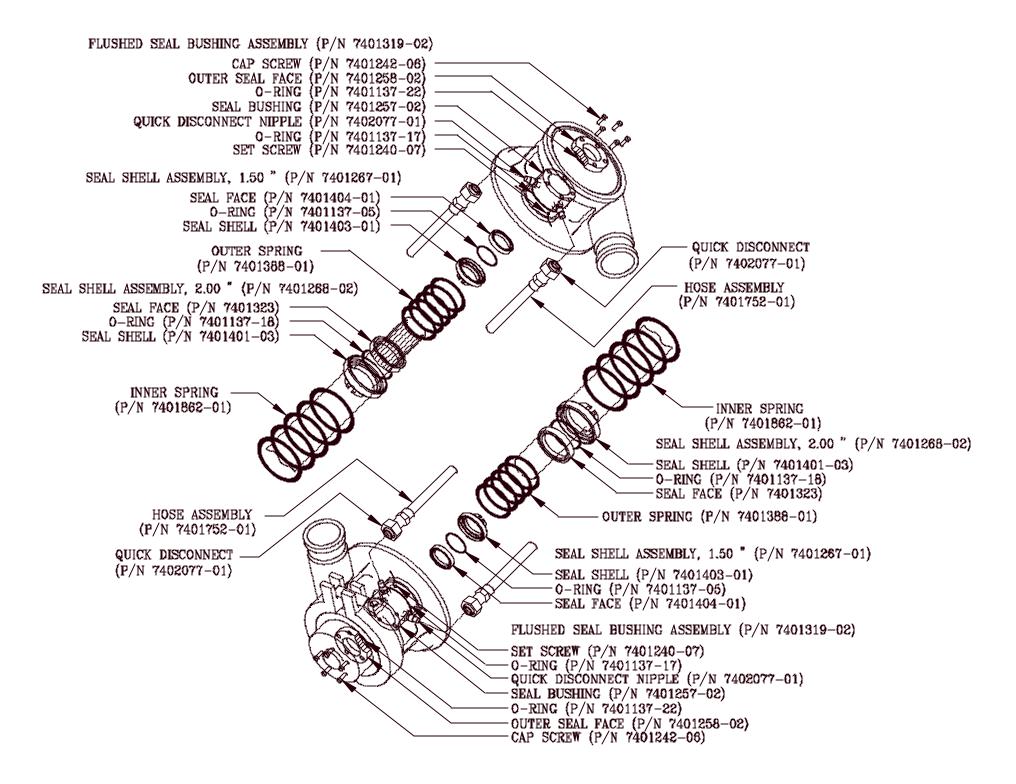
Flushed Standard And Flushed Hard Face Seal Assemblies, Tangential Heads Backside of Figure 7-4 -- 11 x 17 foldout drawing
